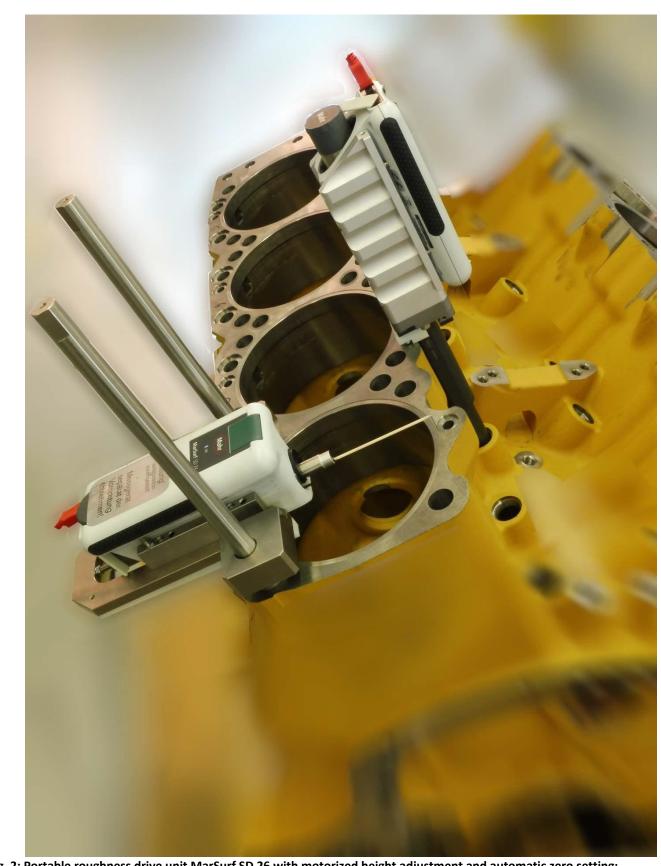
Portable roughness drive unit MarSurf SD 26 with motorized height adjustment and automatic zero setting; Measurement of the cylinder head plane and the valve guide.
